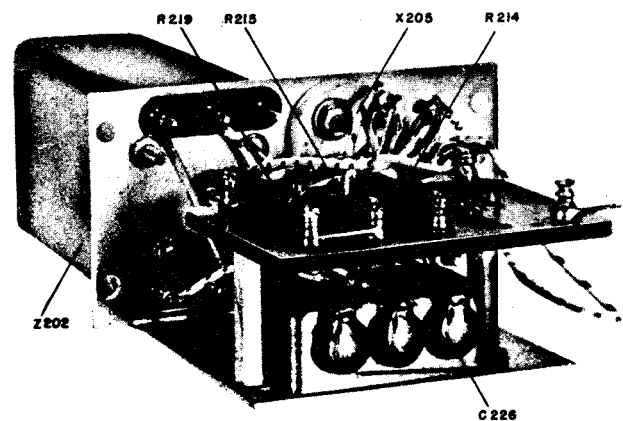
Receiver 2nd I-F Assembly, Bottom View
